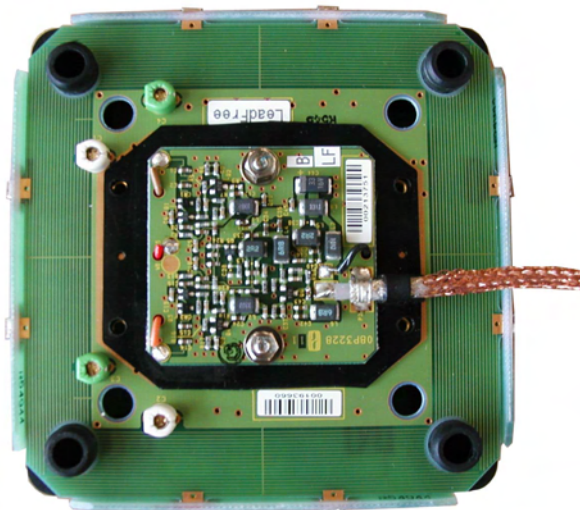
Shield cover of Pre-AMP unit removed
